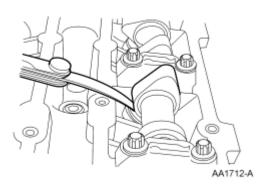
Measuring Each Valve's Clearance Using A Feeler Gauge Courtesy of FORD MOTOR CO.
